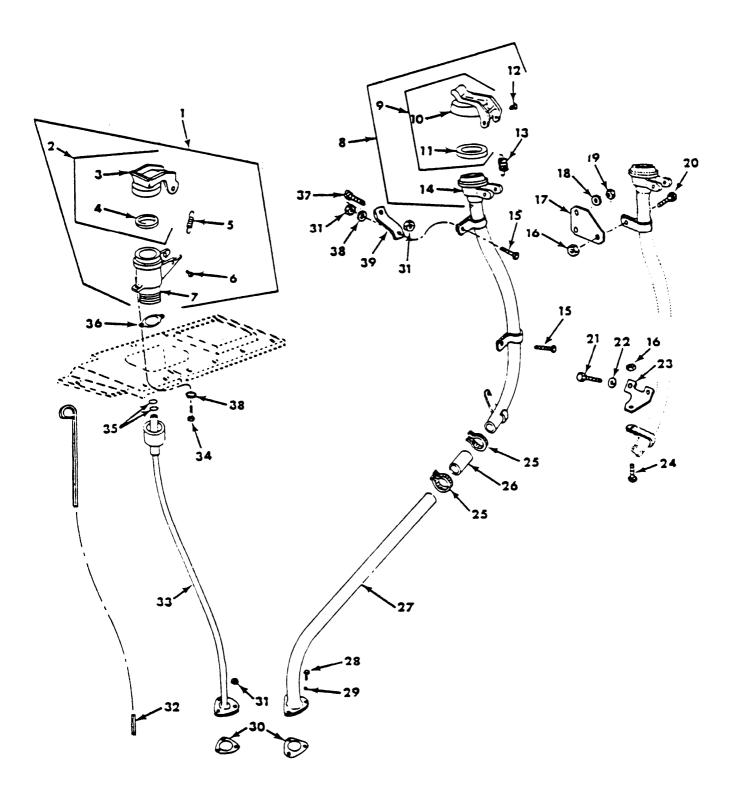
OIL GAGE ROD TUBE, OIL FILLER TUBE, AND RELATED PARTS.
